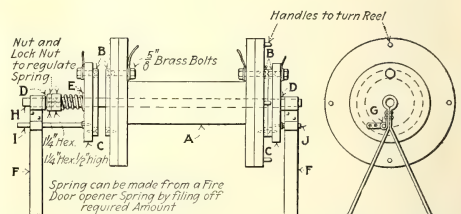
CABLE REEL FOR PORTABLE WELDING OUTFITS
